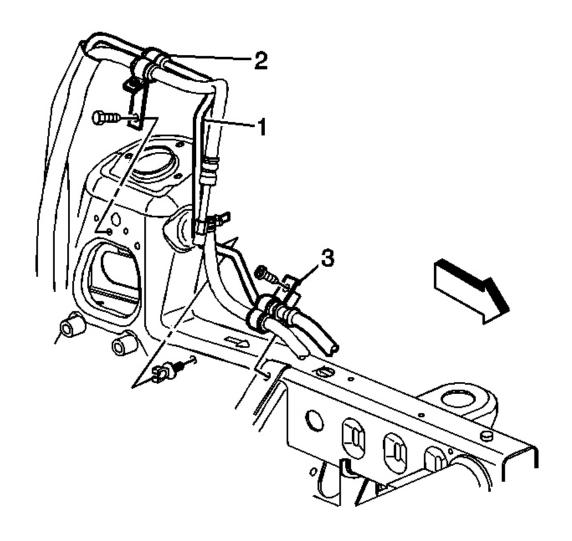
View Of Power Steering Pressure Hose, Return Hose & Pump Courtesy of GENERAL MOTORS CORP.
